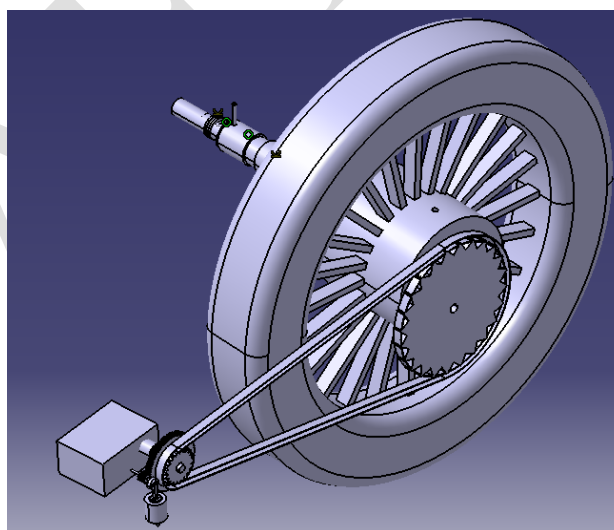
COMPLETE ASSEMBLY REAR VIEW
